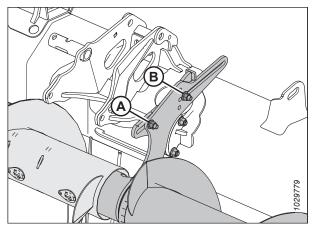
Initial Position of Adjustable Mounts – Three-Piece Auger
